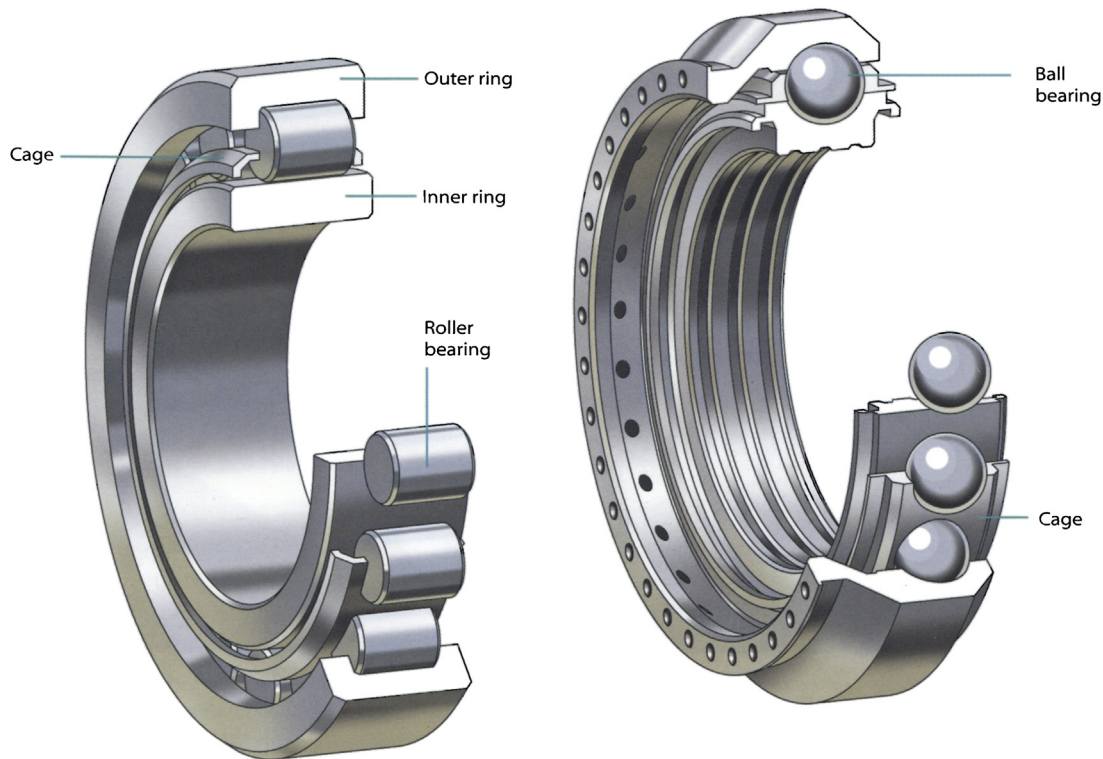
Ball and roller bearing components. (Source: Rolls Royce.)
